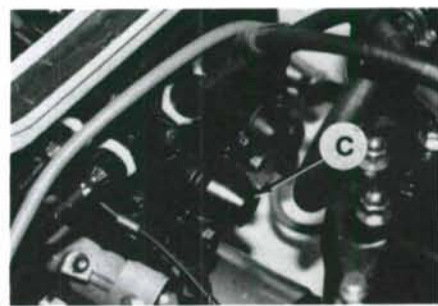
Remove cap (C) to expose six-wire connector. Refer to text.
